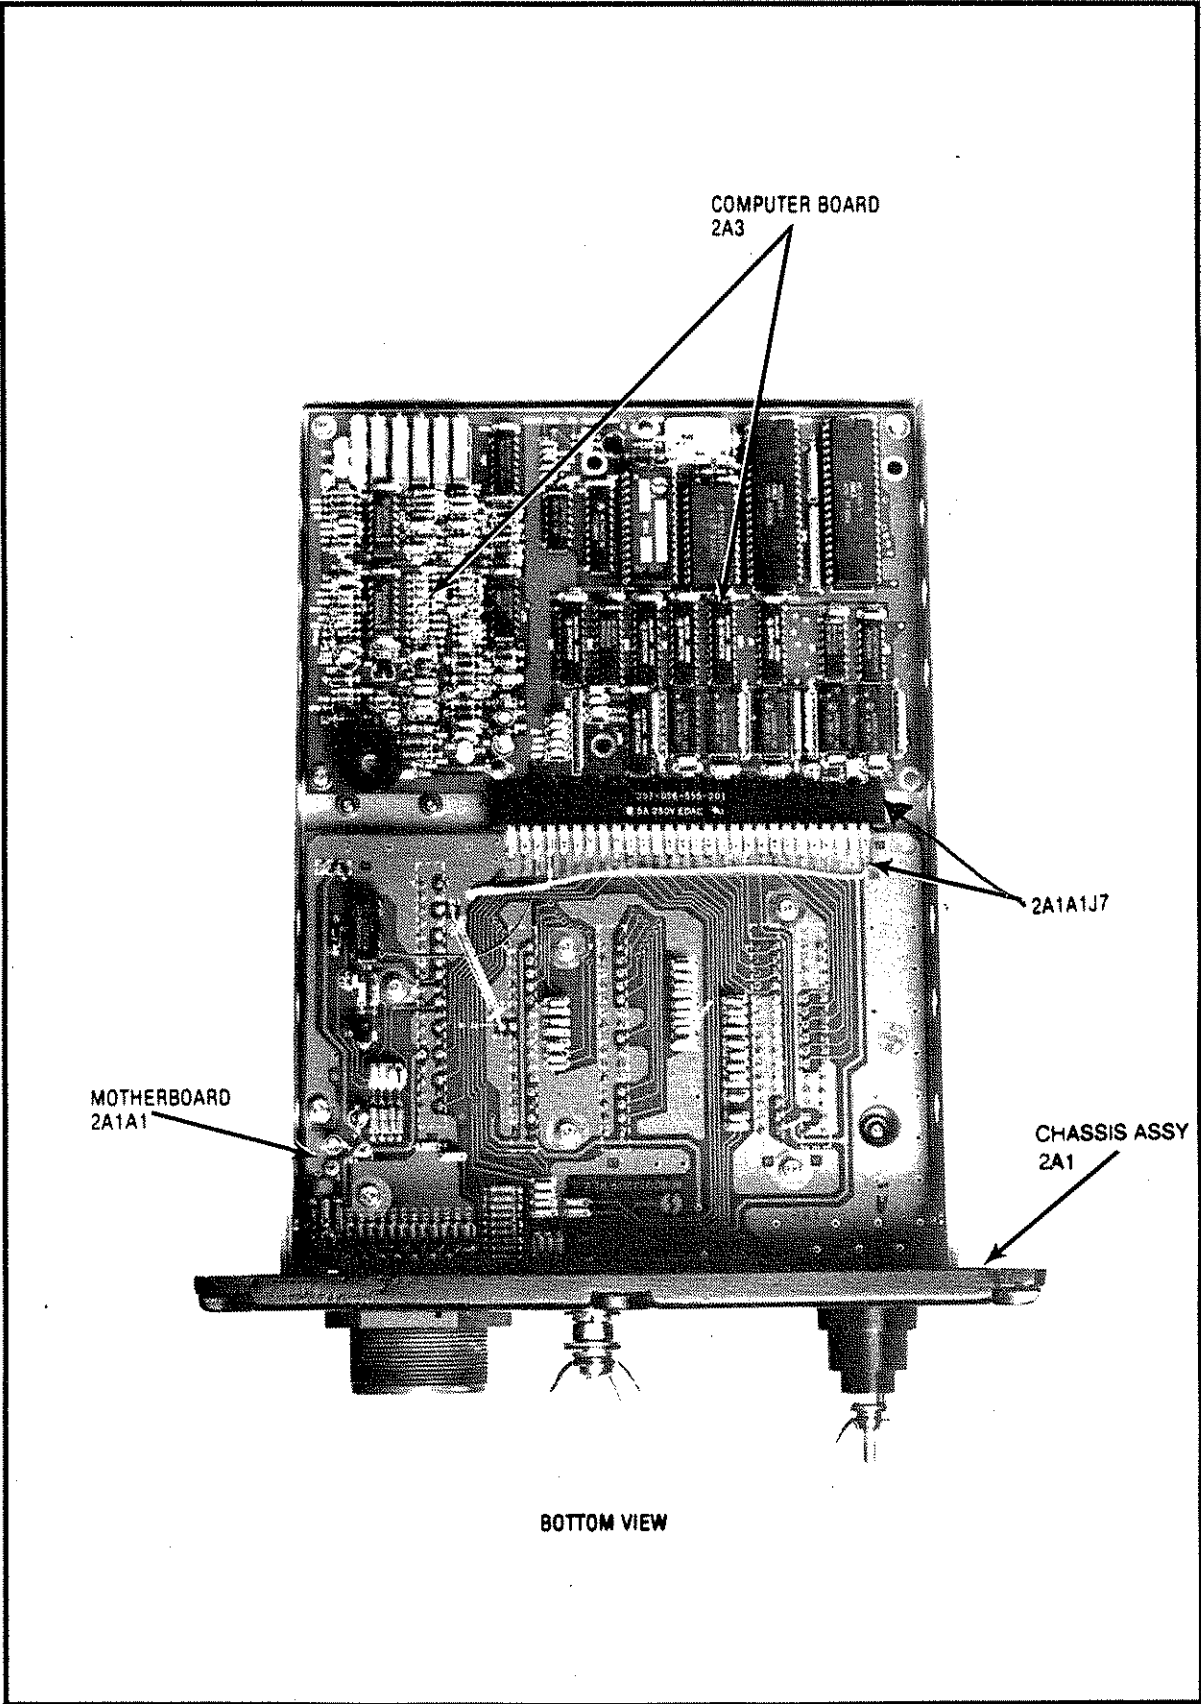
Major Assembly and Component Locations (Bottom View).
